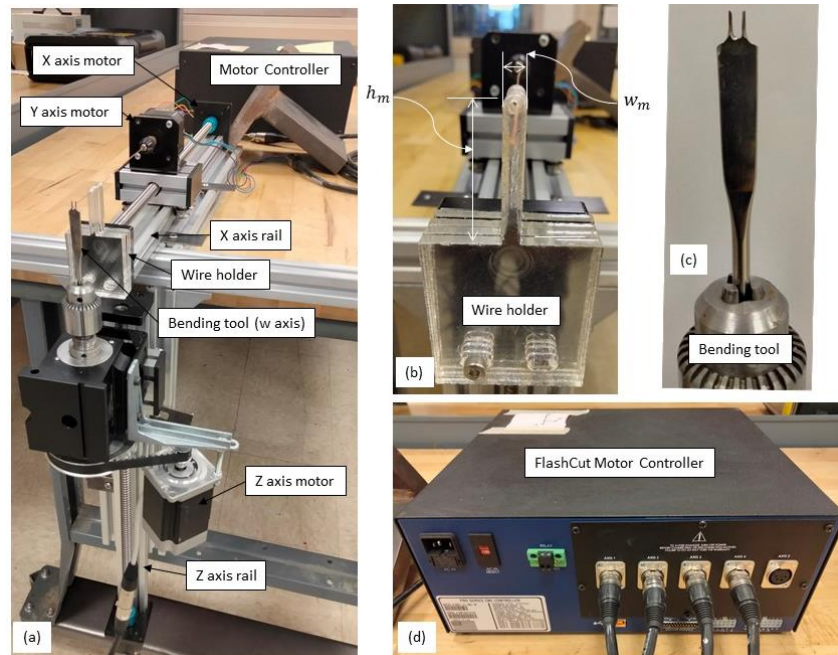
Parts of the bending machine, (a) Wire bending machine, (b) wire holder, (c) bending tool (d) FlashCut motor controller.
